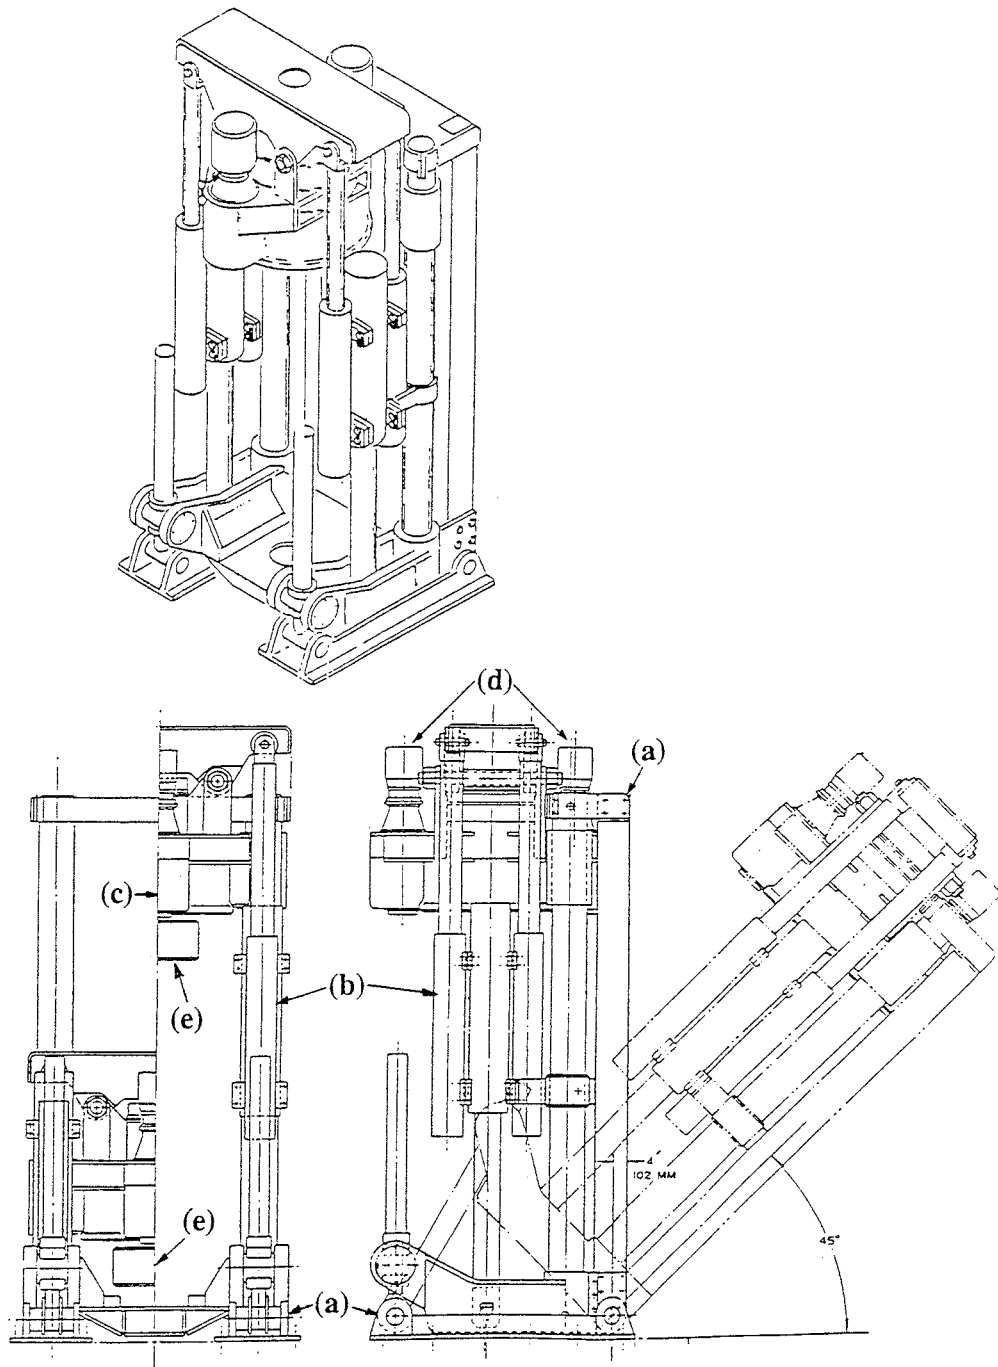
Subterranean-005L-137 raiseboring machine. The main components of the machine are: a) base frame, b) hydraulic cylinders, c) gear box, d) rotation motors, e) fastening sleeve for drill string. The device for changing drill pipes and locking is not shown.
